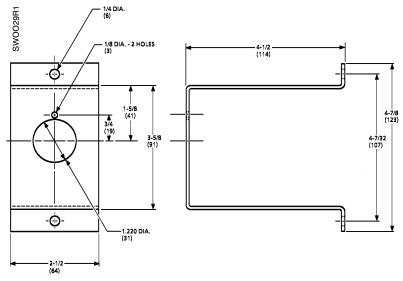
Surface Mounting Bracket. Dimensions in Inches (Millimeters).
